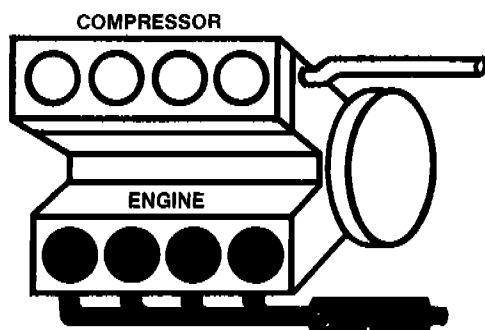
CYLINDER ARRANGEMENT OF A V-8 MONOBLOCK RECIPROCATING COMPRESSOR.
